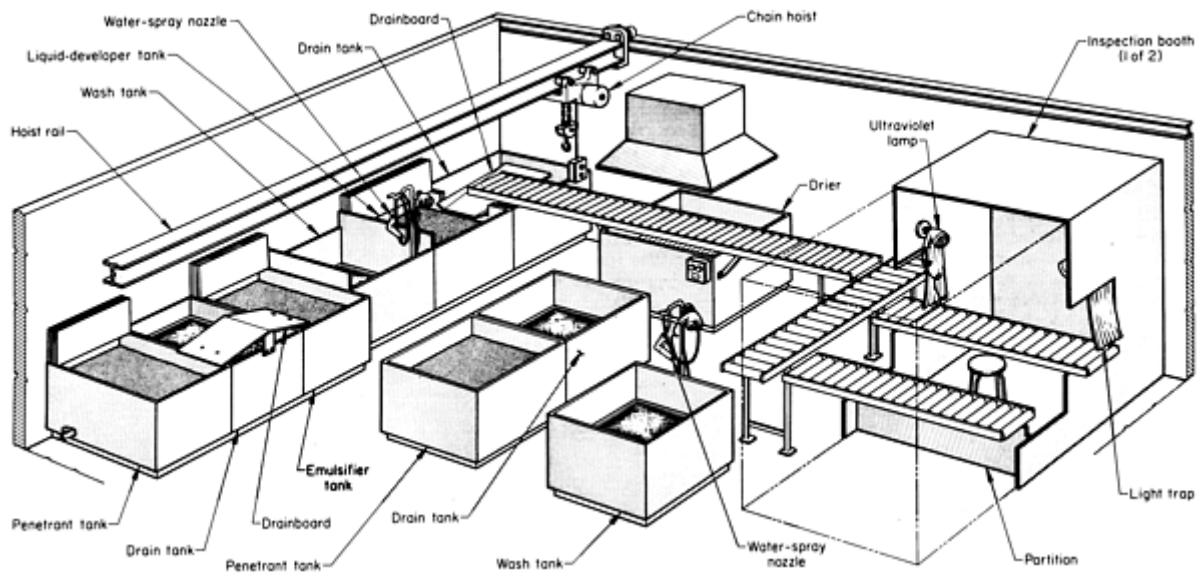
Arrangement of equipment used in one foundry for the liquid penetrant inspection of a large variety of castings to rigid specifications. Many of the castings require handling by crane or roller conveyor.
